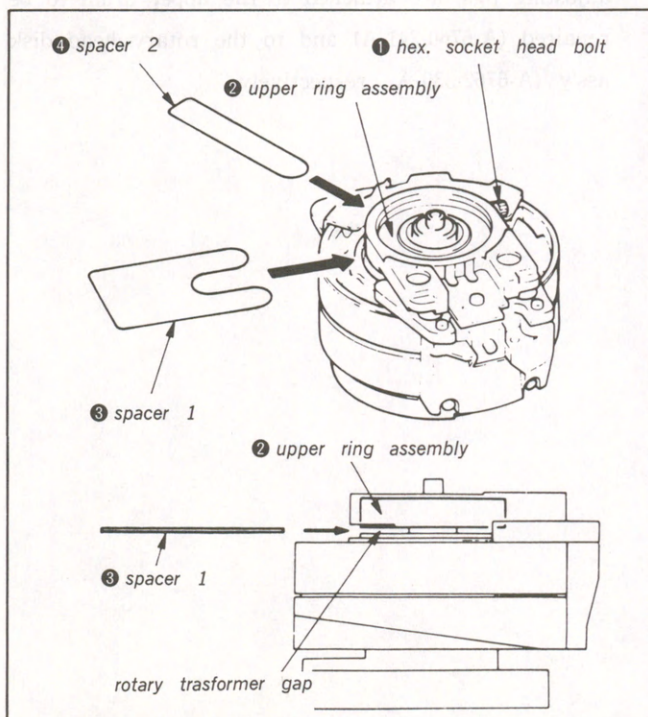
Adjusting the flying erase head rotary transformer gap.
